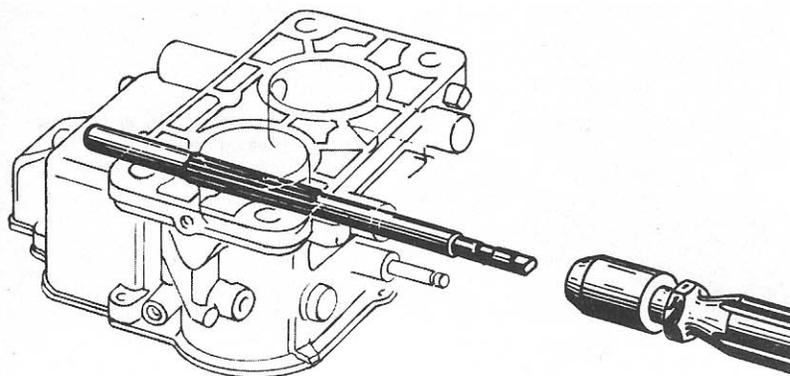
Reaming the throttle shaft bore (Sec 6)
